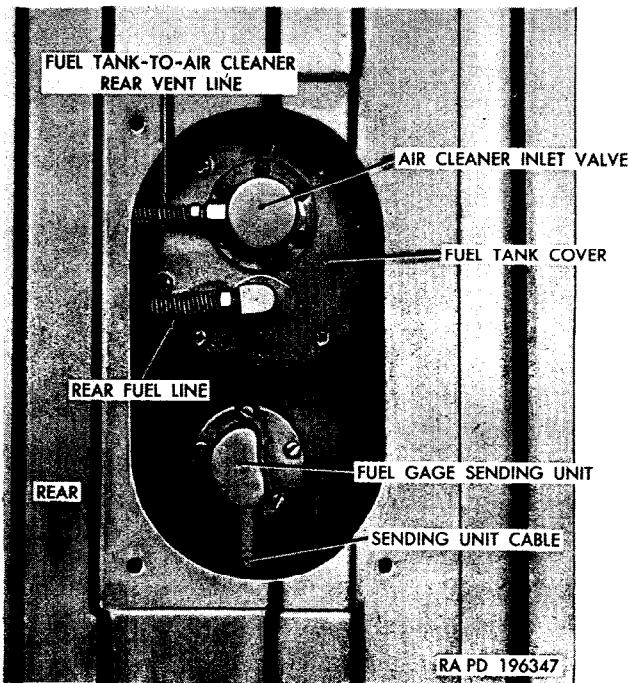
Fuel tank cover, air cleaner inlet valve, and fuel gage sending unit.
